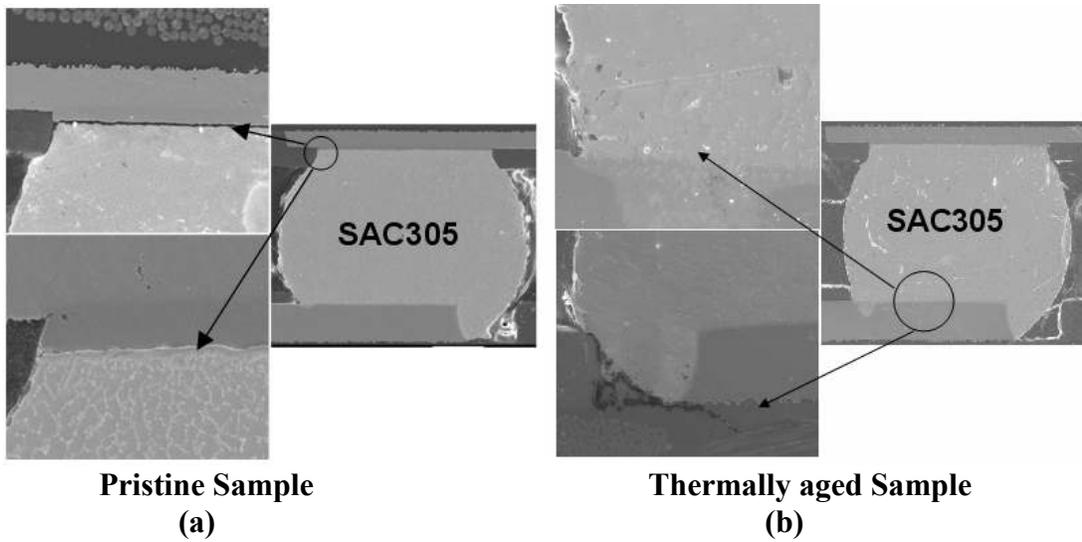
Failure Modes observed in solder joints for Sn3Ag0.5Cu
